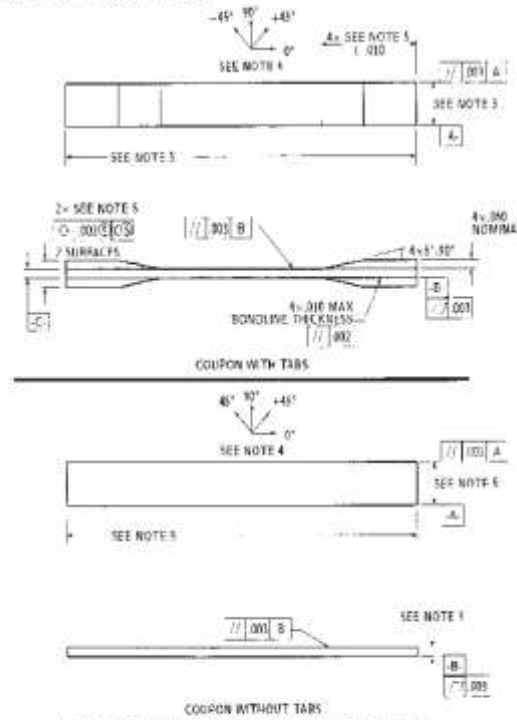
Tension Test Specimen Drawing (Inch-pound)
